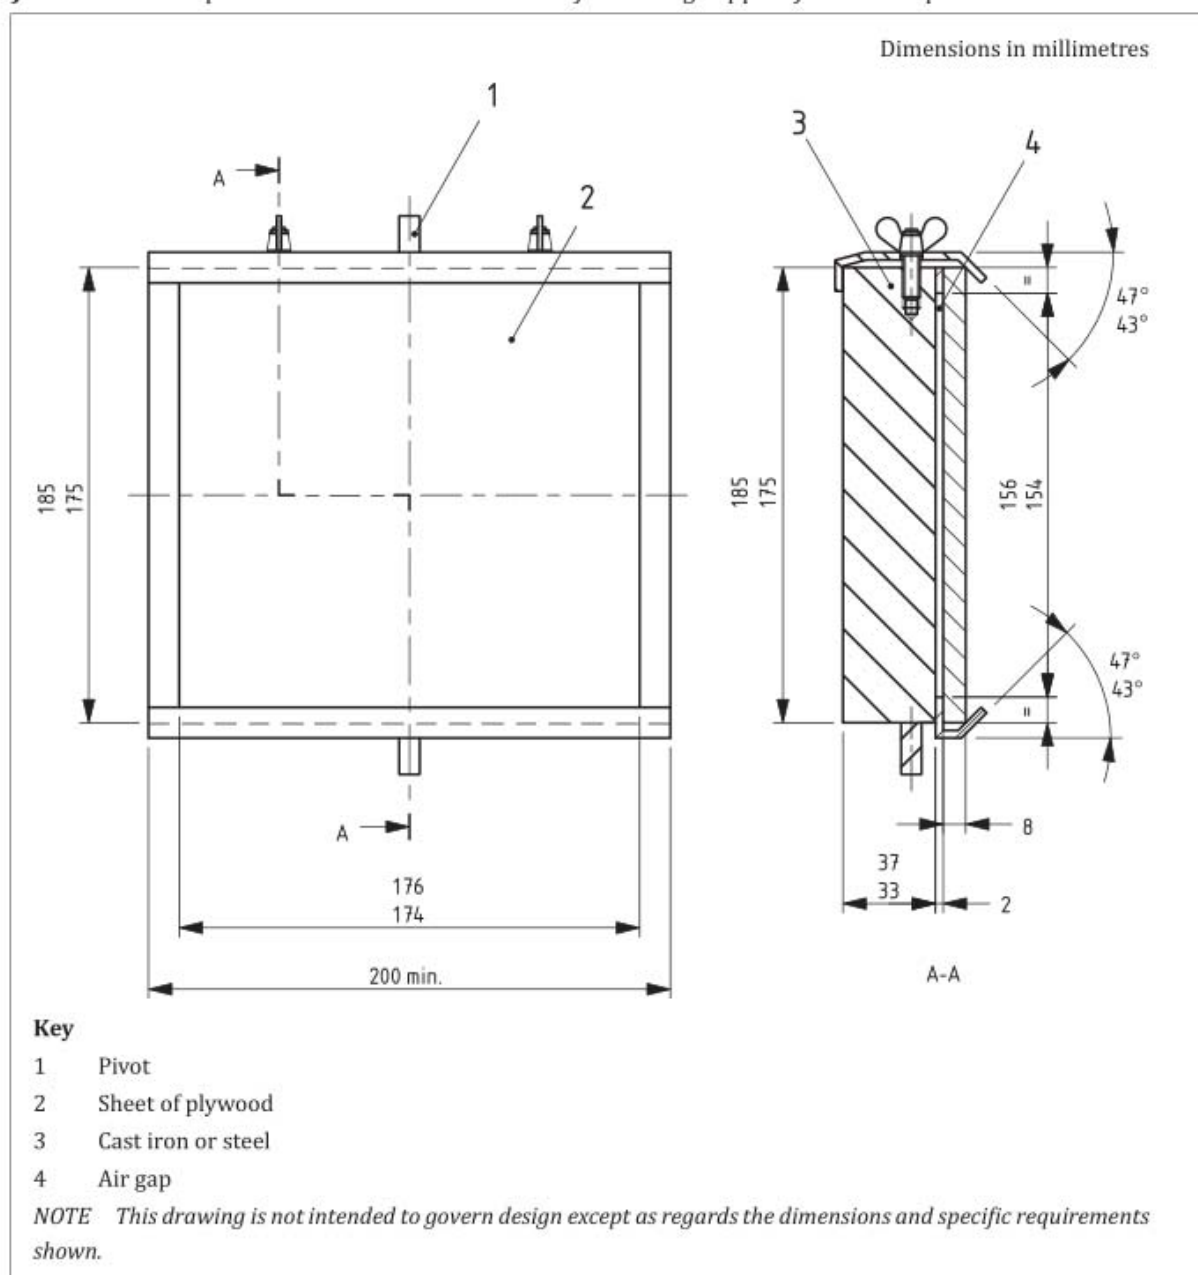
Pendulum impact test: Constructional details of mounting support for test samples
